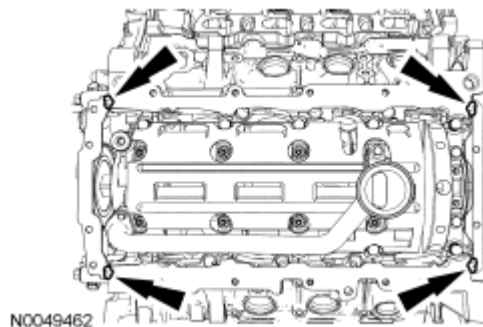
Applying Silicone Gasket & Sealant At Engine Front Cover-To-Cylinder Block Sealing
